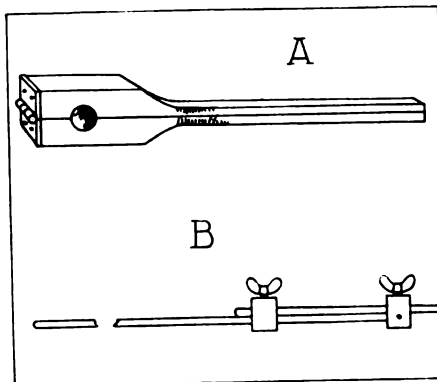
A, Home Made Crankshaft Lapping Tool; B, Simple Aligning Gauge with Which Measurements Can Be Obtained with Great Accuracy.
